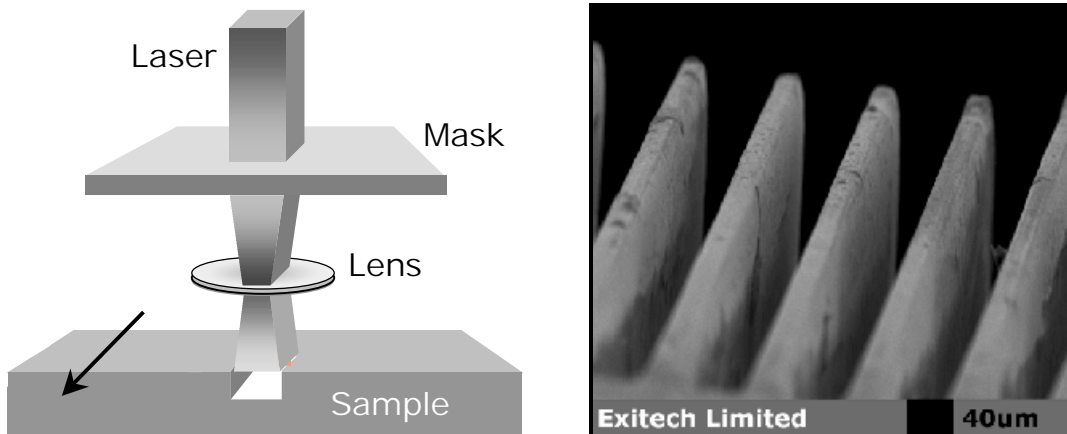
Technique of workpiece dragging and micro-grooves produced in polymer at 248nm.
